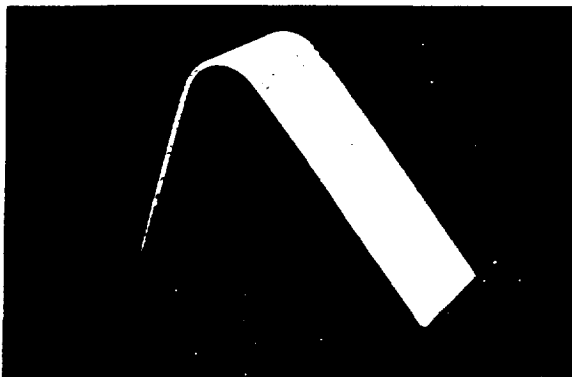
Typical bend test sample coated with wire arc sprayed aluminum (bent around 1.27 cm (0.5 in) mandrel).
